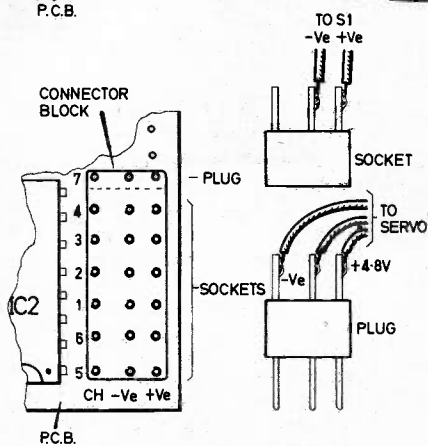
The receiver wired for seven channels using 7-way connector block mounted directly on p.c.b. External connections are via one socket and six plugs.
